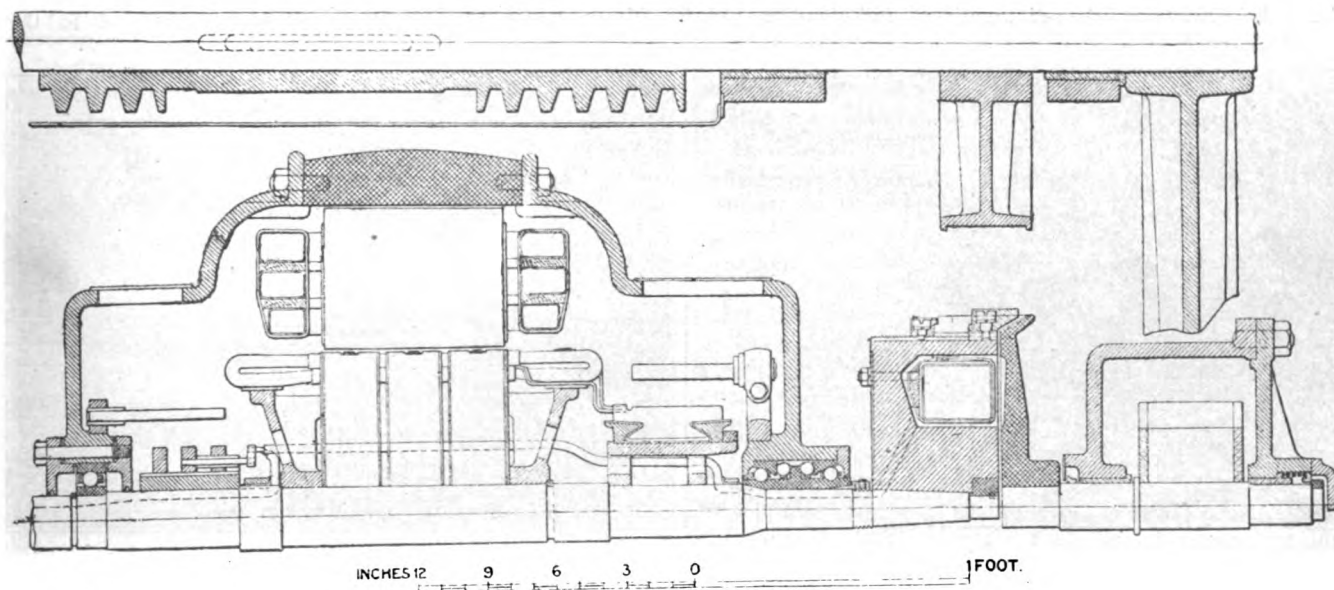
MOTOR, CLUTCH AND GEARING FOR 11½-IN. RUDDER POST
